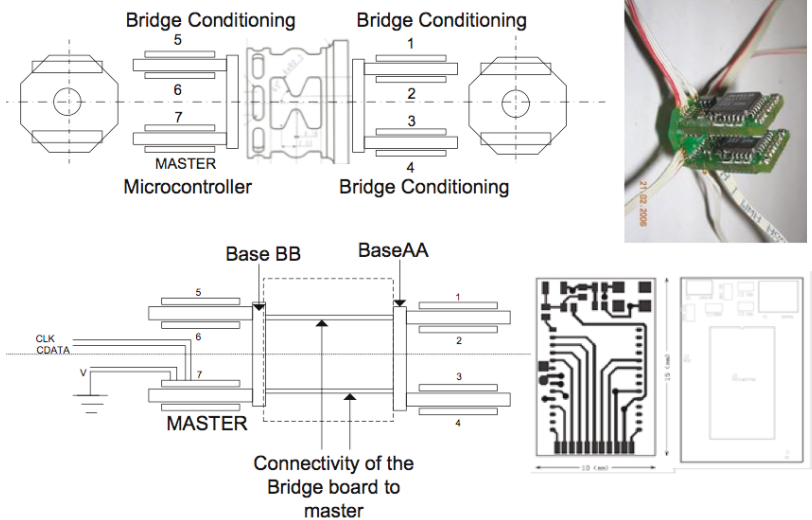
Final assembly of electronic boards. Inside of the boards the microcontroller and the signal conditioners are placed.
